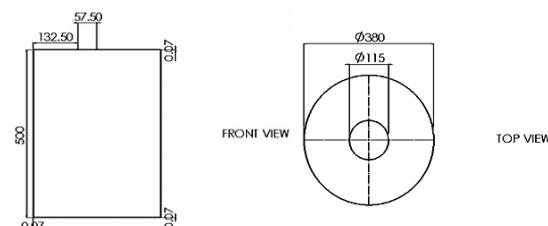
Biochar kiln (dimensions displayed in millimeters)
